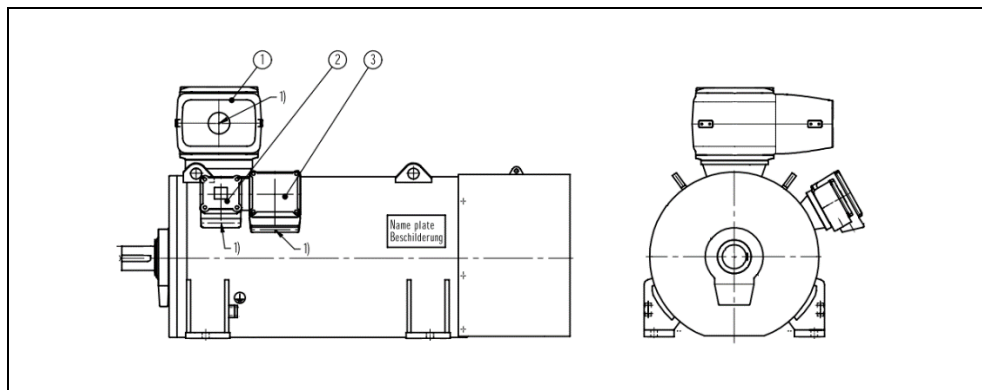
Standard terminal box mounting, air-cooled motors, steel-welded housing IC411, IM B3
